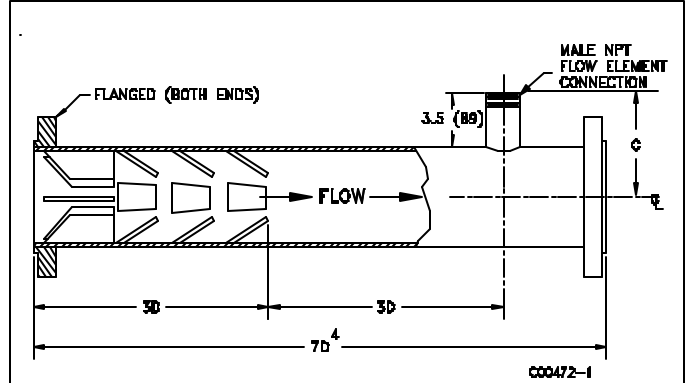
VMR with Flanged Process Connections and Male NPT Flow Element Connection
